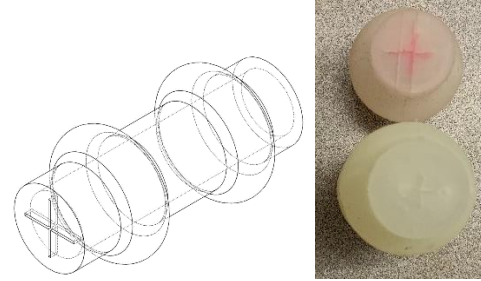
ARD VERSION 2 (CROSS-CUT VALVE).
